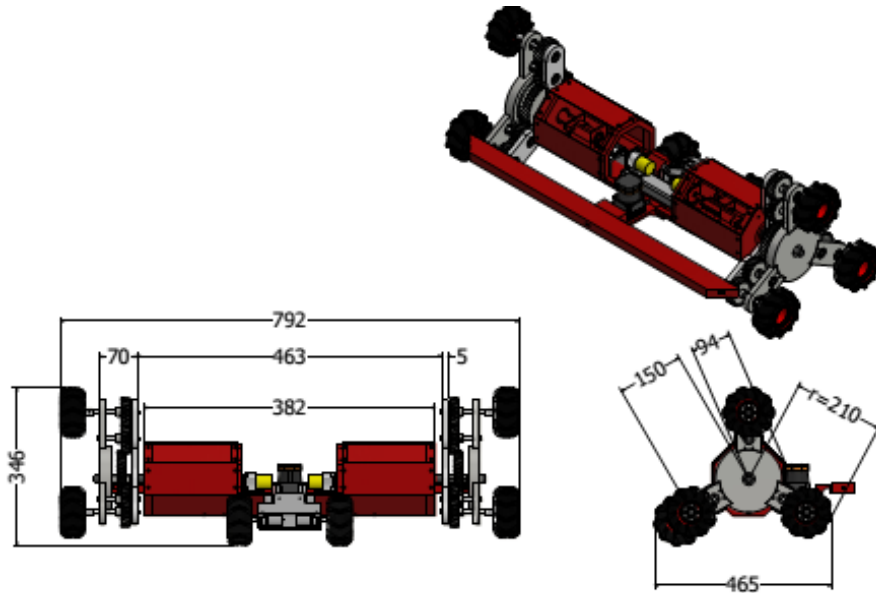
Dimensions of Ladder Climbing Robot in mm
